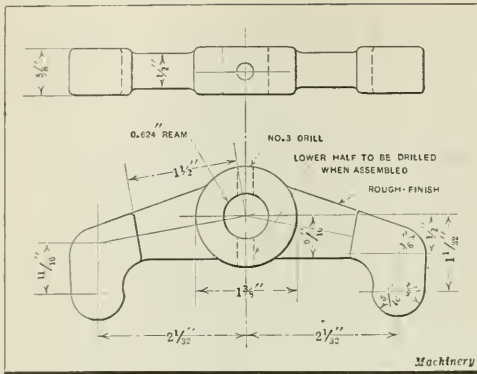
Drop-forging trimmed with the Equipment shown in Fig. 5
